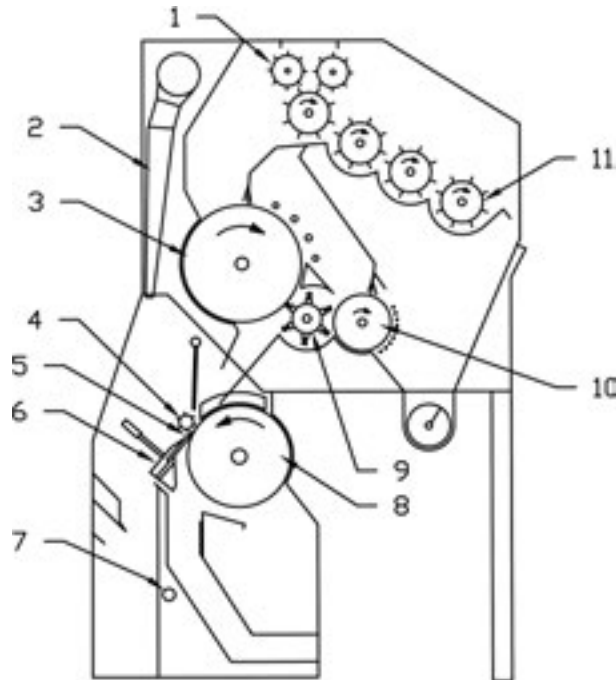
Cross section of the Continental Eagle roller gin stand and feeder. 1, Feed rollers, 010 rpm; 2, Dust hood; 3, Main saw, 316 rpm; 4, Rotary knife; 5, Stationary knife; 6, Knife bar; 7, Jack shaft, 316 rpm; 8, Ginning roller; 9, Doffing brush, 1,308 rpm; 10, Reclaimer saw, 351 rpm; 11, Spiked cylinder, 530 rpm. (Courtesy of Bajaj ConEagle LLC.)
